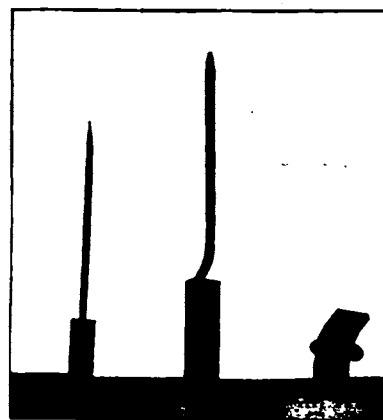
TEMPERED COPPER SOLDERING TOOLS.
